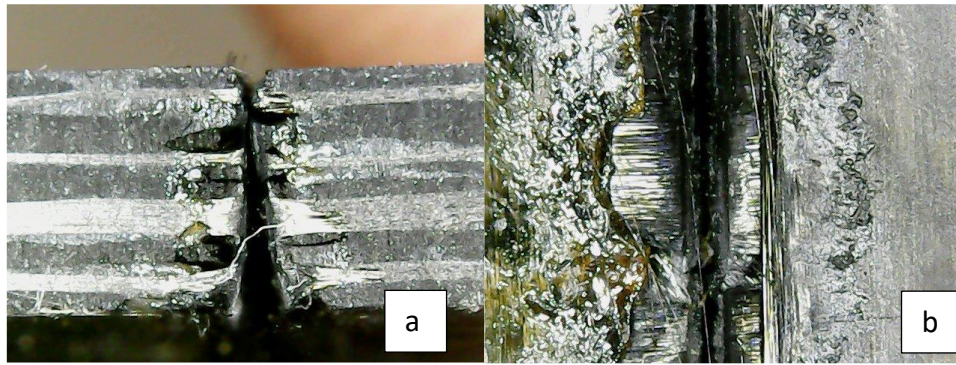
Microscopy images of trials using 1 pass, 2.5 m/min cutting speed and 16 bar gas pressure and 1 mm gas nozzle. (a) side view, (b) top view.
